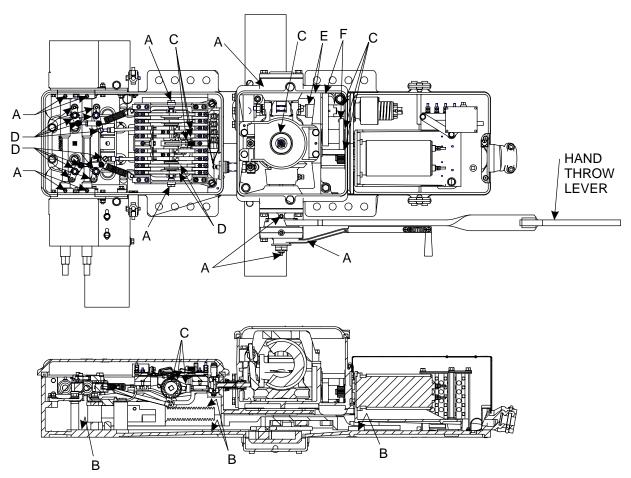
Lubrication Diagram for M-23A, M-23B Switch Machine
